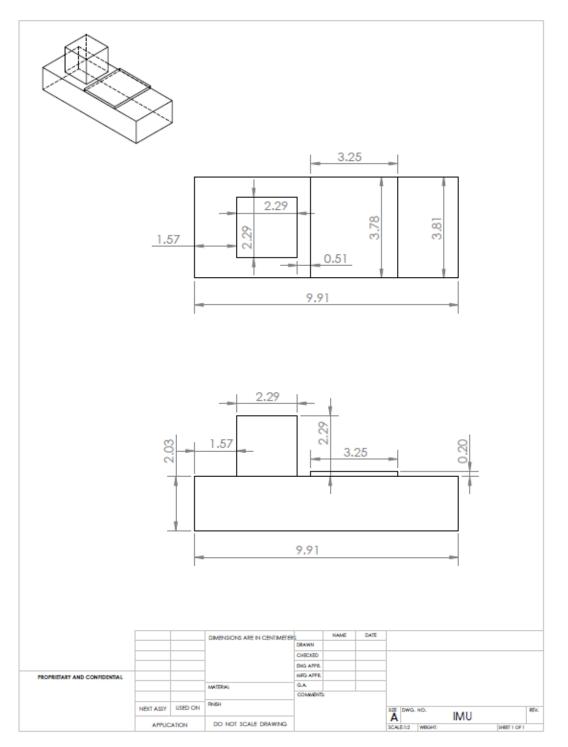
Mechanical drawing of the IMU and its new mounting block with dimensions in centimeters. Note the mounting block is oversized and will be reconfigured to a smaller height less than the 2.03cm as drawn.
